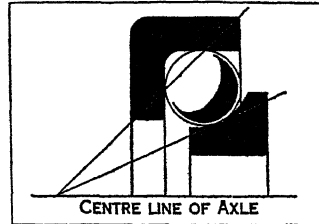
SECTION SHOWING LINES OF CONTACT IN A THRUST BEARING
